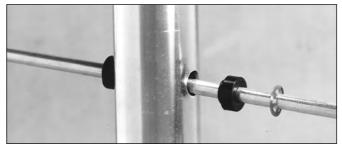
Insulated elements up to ½ inch in diameter can be mounted through the boom using plastic insulators. Stainless-steel push-nut retaining rings hold the element in place.
